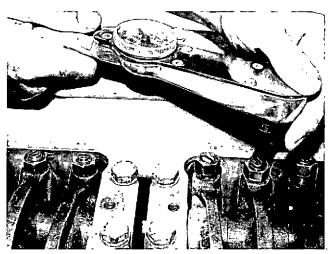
(N11466) Adjusting injector plungers - N Series
